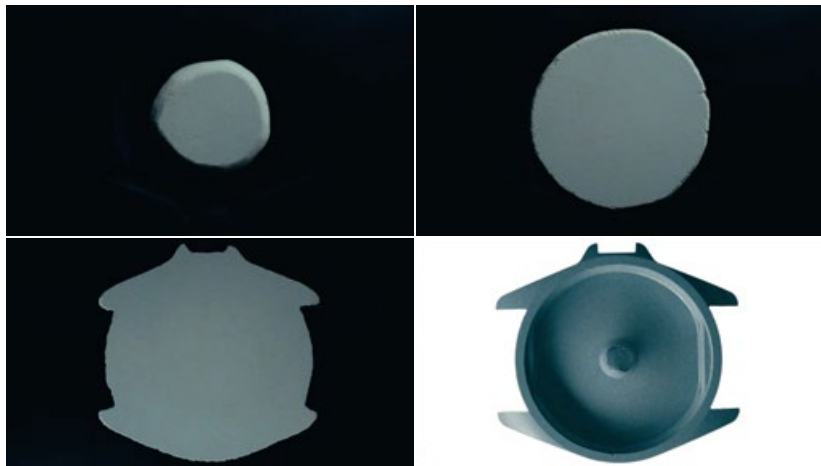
Stills from a Chanel social media video showing the injection moulding of a J12 watchcase from inside the mould tool [1] (Courtesy Chanel)
